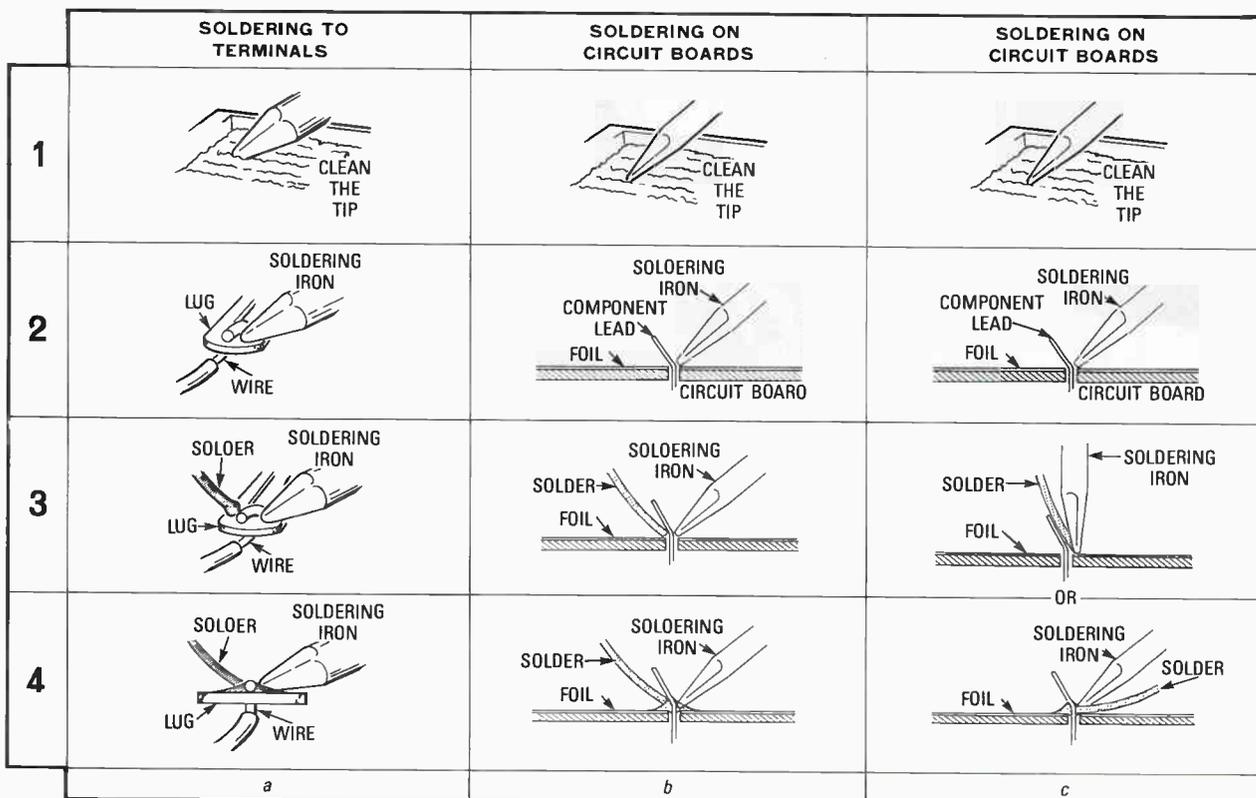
ALTHOUGH IT’S USUAL to heat the material to which solder will be applied (a and b), the heat is applied to the solder (c) when soldering hairline printed-circuit traces.
